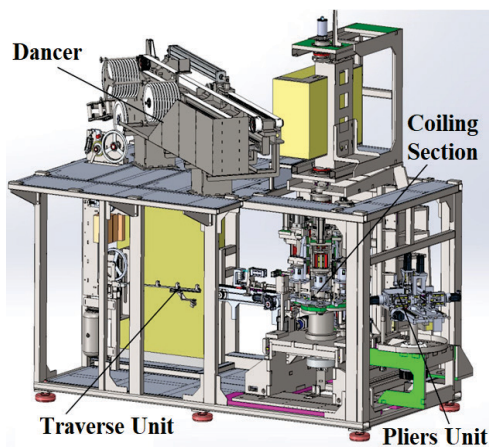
Sections of the 3-headed spool-coil winding machine with increased capacity
